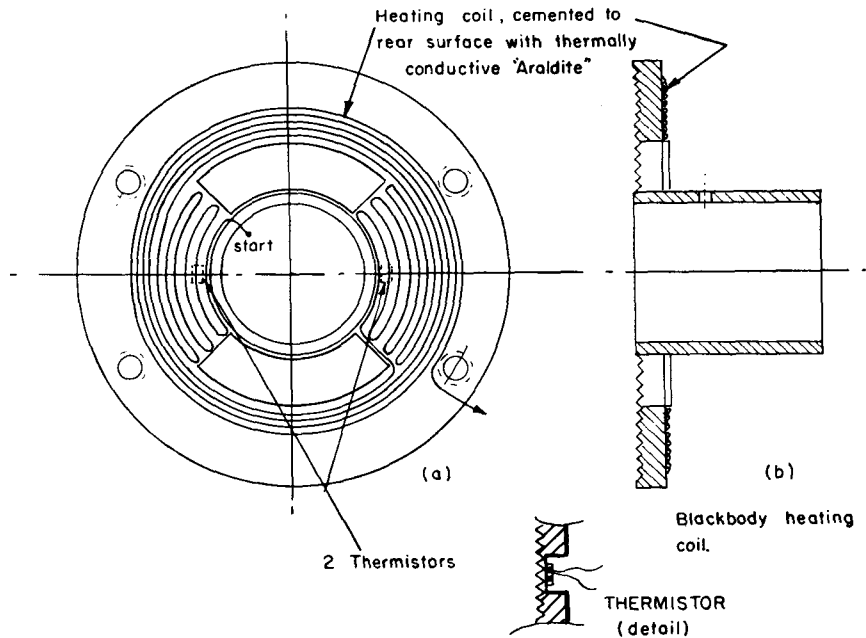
Detail of heating coil and thermistors for grooved blackbody. Groove dimensions in 3b and inset are schematic only.
